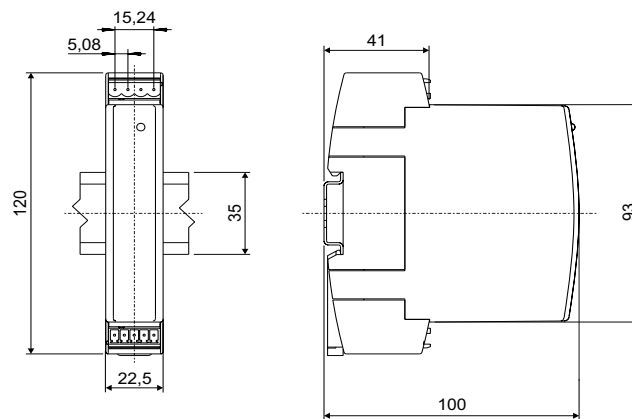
Overall dimensions and fixing way of the P11T transducer.
